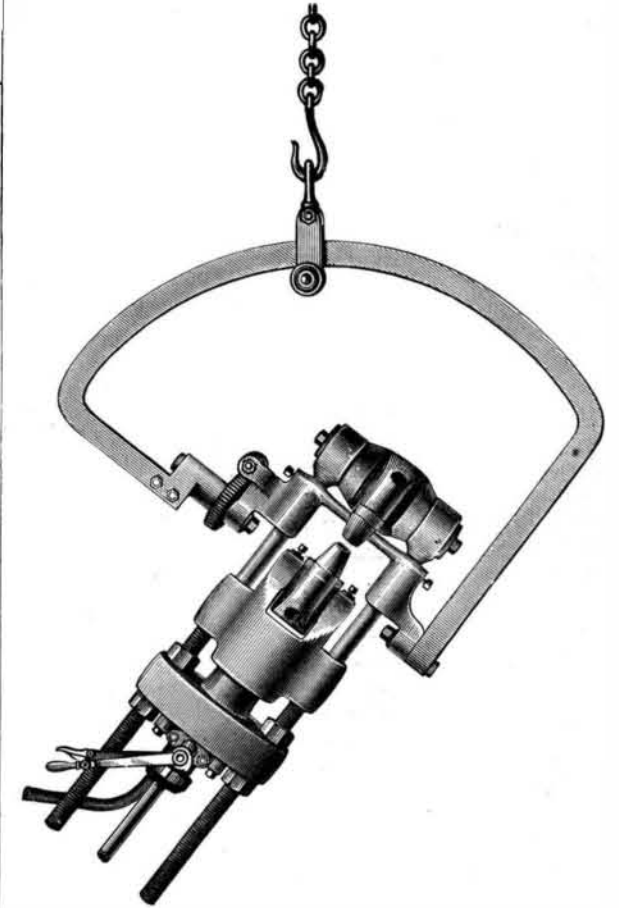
SUSPENDED RIVETING MACHINE—BOTTOM VIEW.
